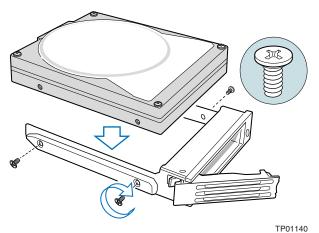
Installing Hot-swap Hard Drives into Drive Carrier
